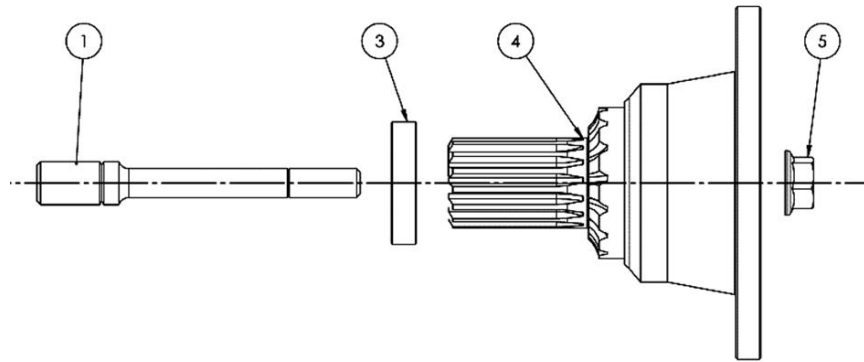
Installation of the 1350/1410 and 1310 series flange adapter kits to the DT12 Rear PTO.
